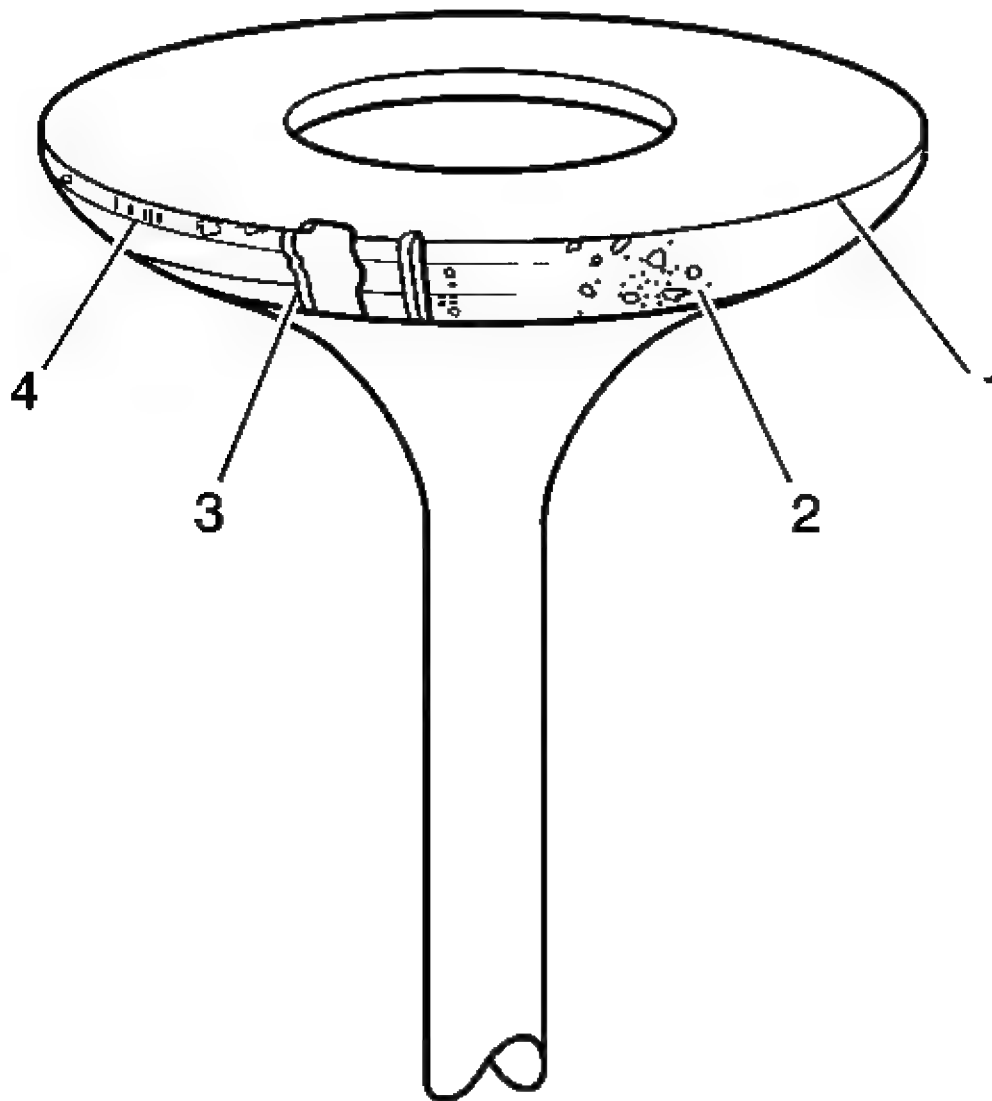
Inspecting Valve Face For Burning, Pitting & Cracking
